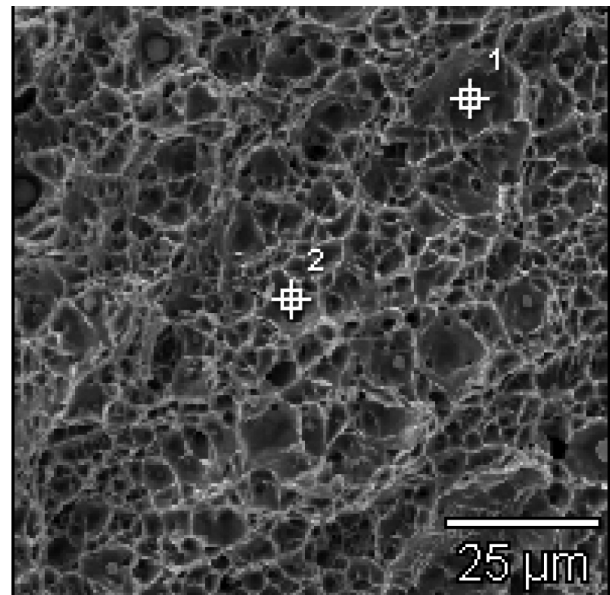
Small oxide inclusions in weld, the oxygen amount (380 ppm)
